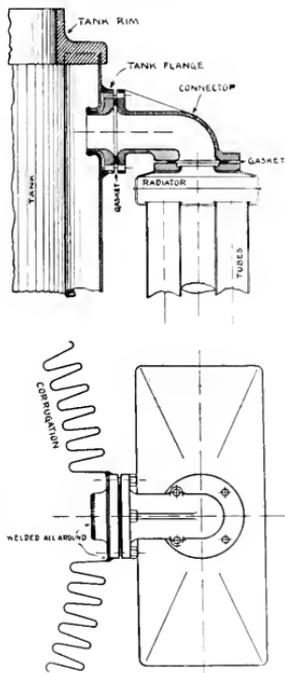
Method of Attaching Radiator to Corrugated Tank
